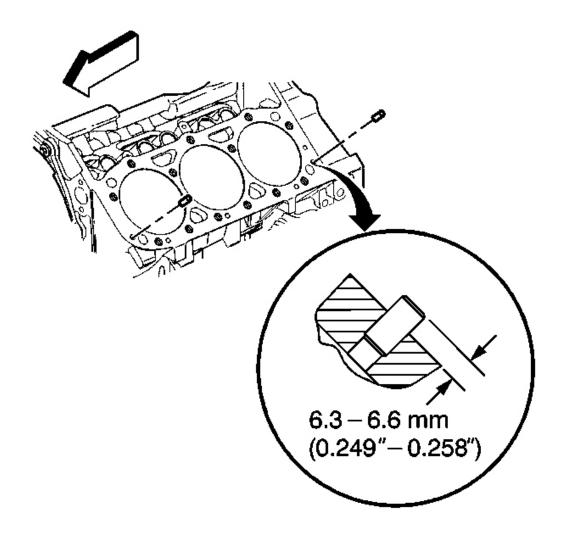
Cylinder Head Locator Pins Courtesy of GENERAL MOTORS CORP.
